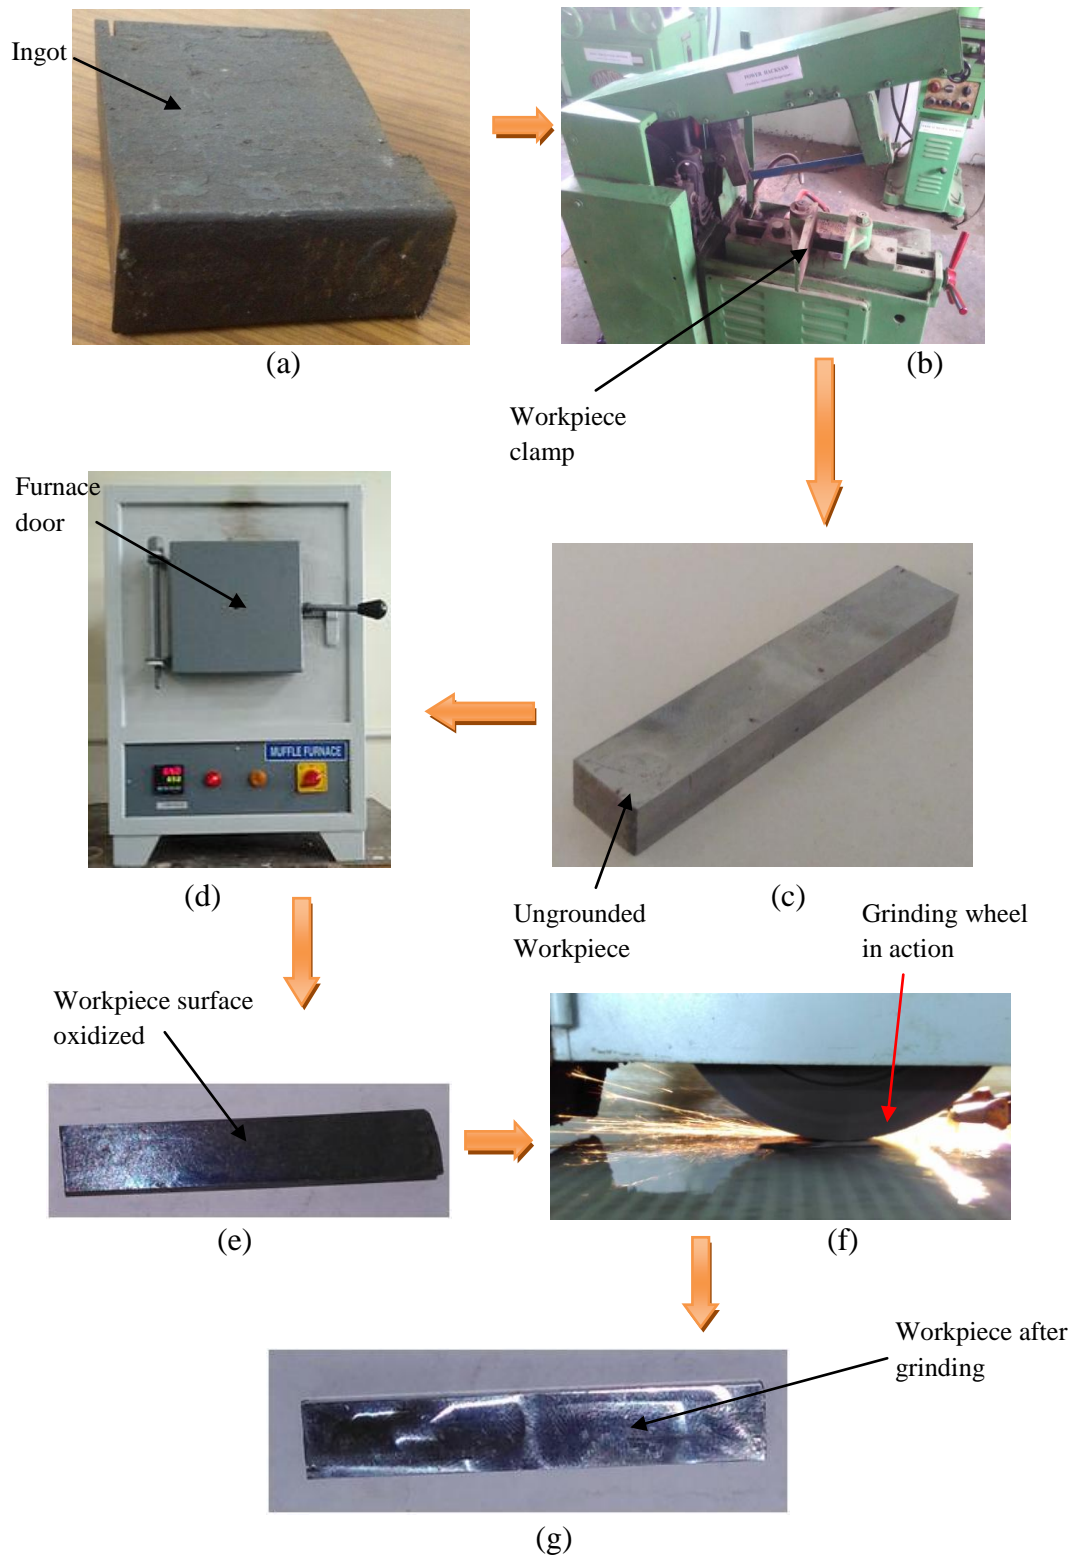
Pictorial flow diagram for the steps followed while workpiece preparation (a) raw ingot of EN31, (b) power hacksaw used for cutting the workpiece, (c) workpiece machined from ingot, (d) muffle furnace used for heat treatment, (e) workpiece after heat treatment, (f) grinding operation on heat treated workpiece and (g) workpiece after grinding
